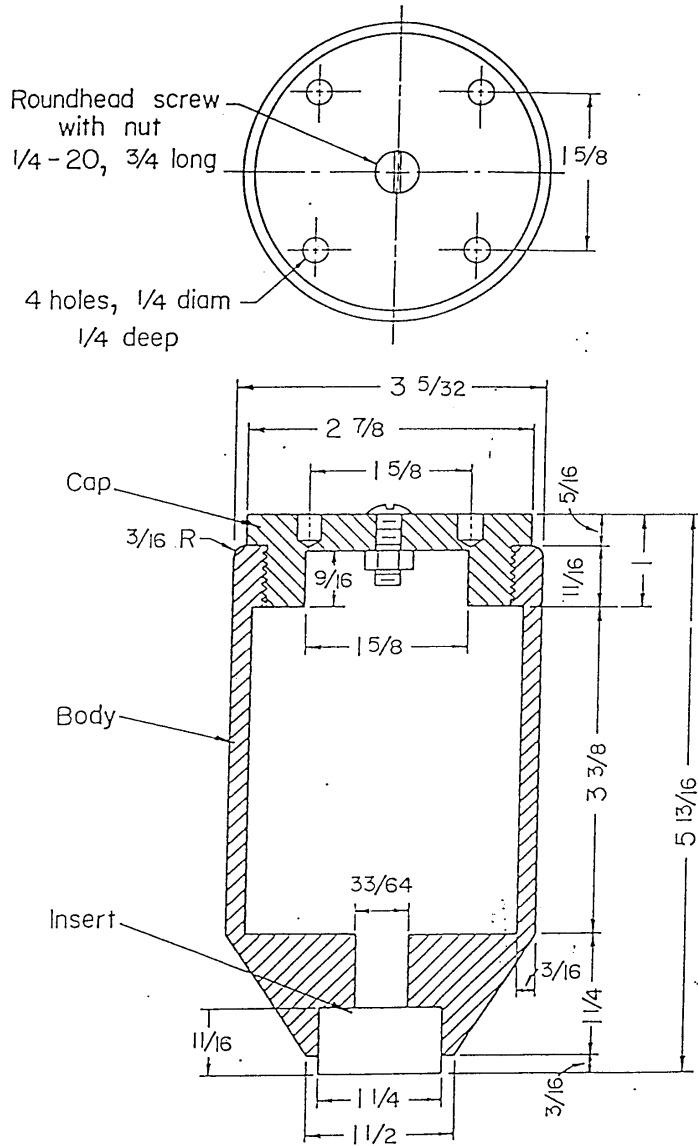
Drop weight assembly (Bureau of Mines design).
